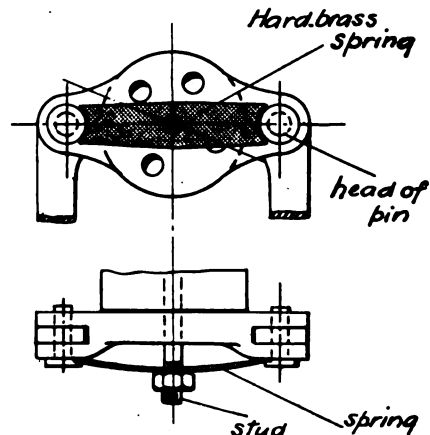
ALTERNATIVE SPRING DEVICE FOR REGULATOR VALVE.
